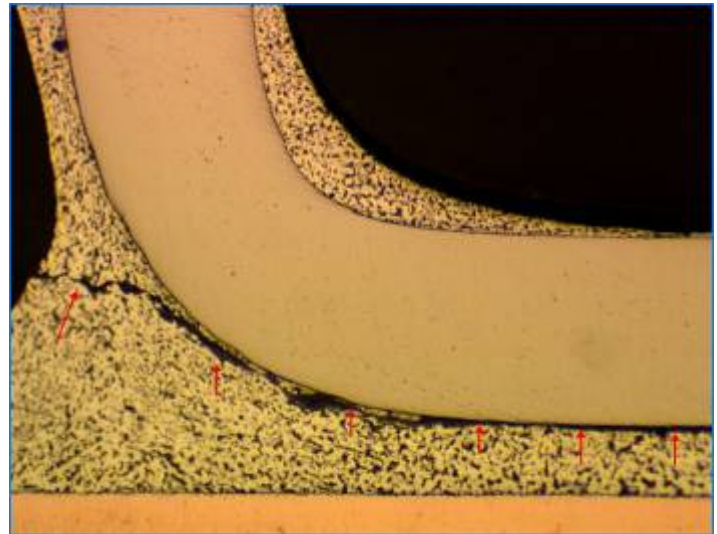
cross section, SN63, U61, right lead solder crack, 200xa
